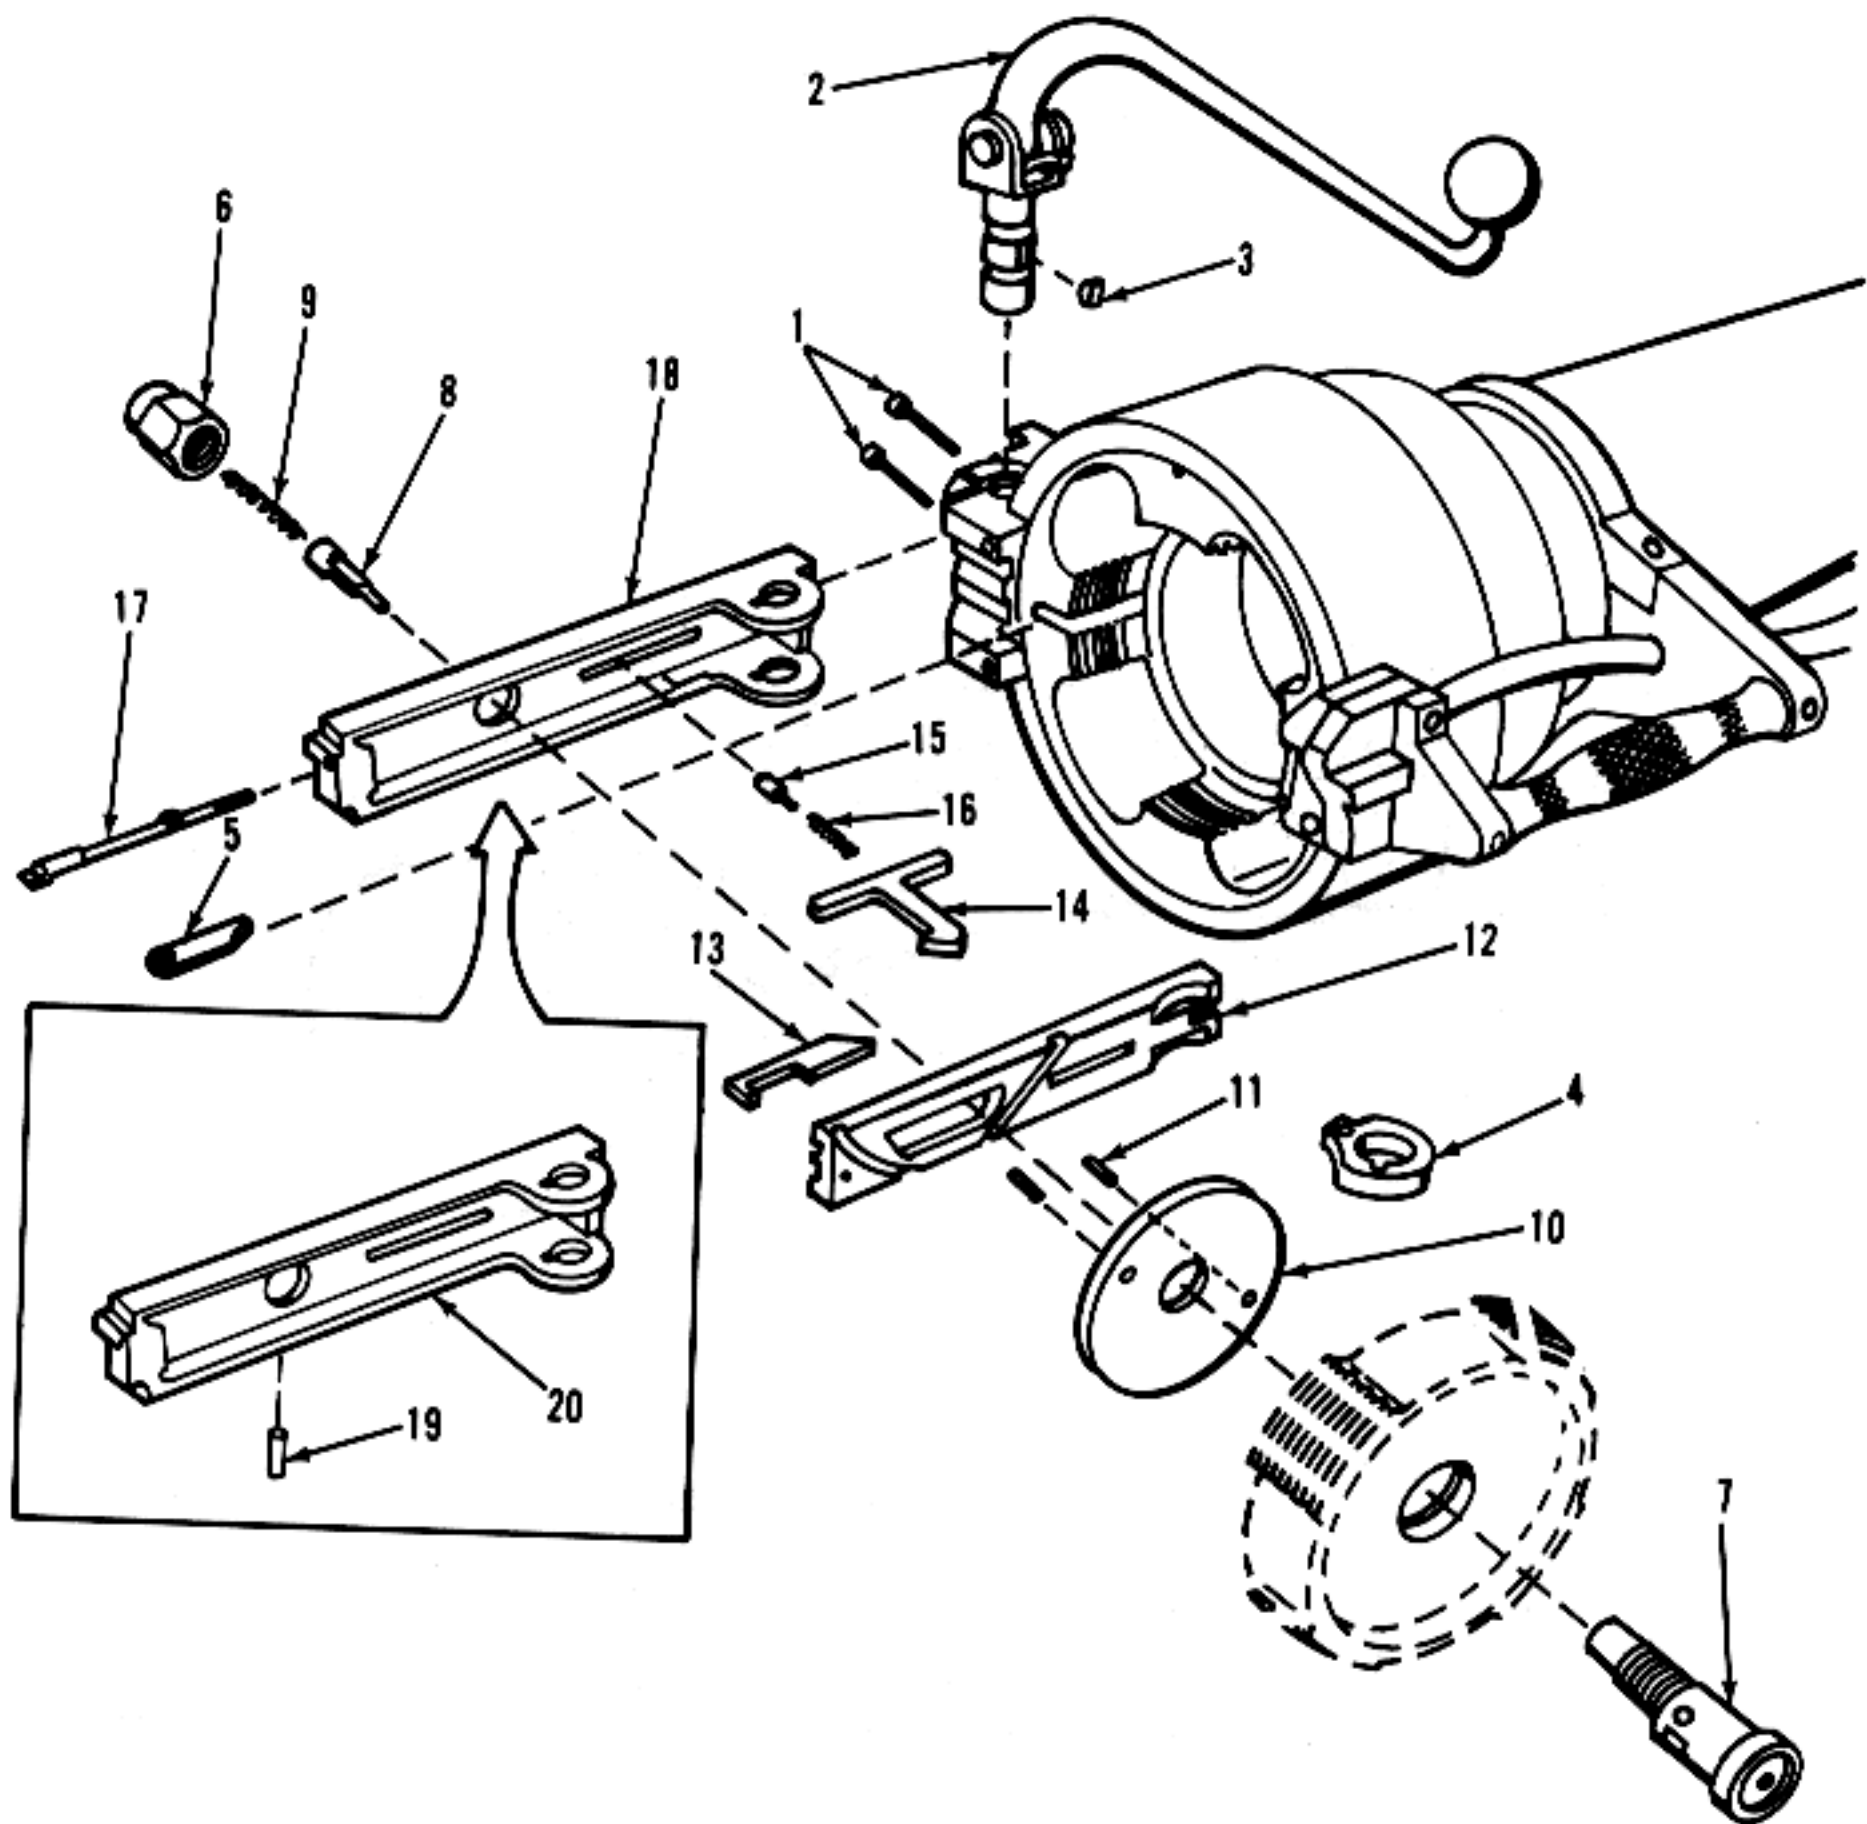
Cannon, 106-MM: M206 and Hinge Assembly.
